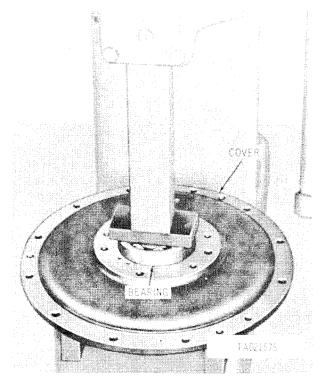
Pressing clutch upper ball bearing into fan drive housing.
